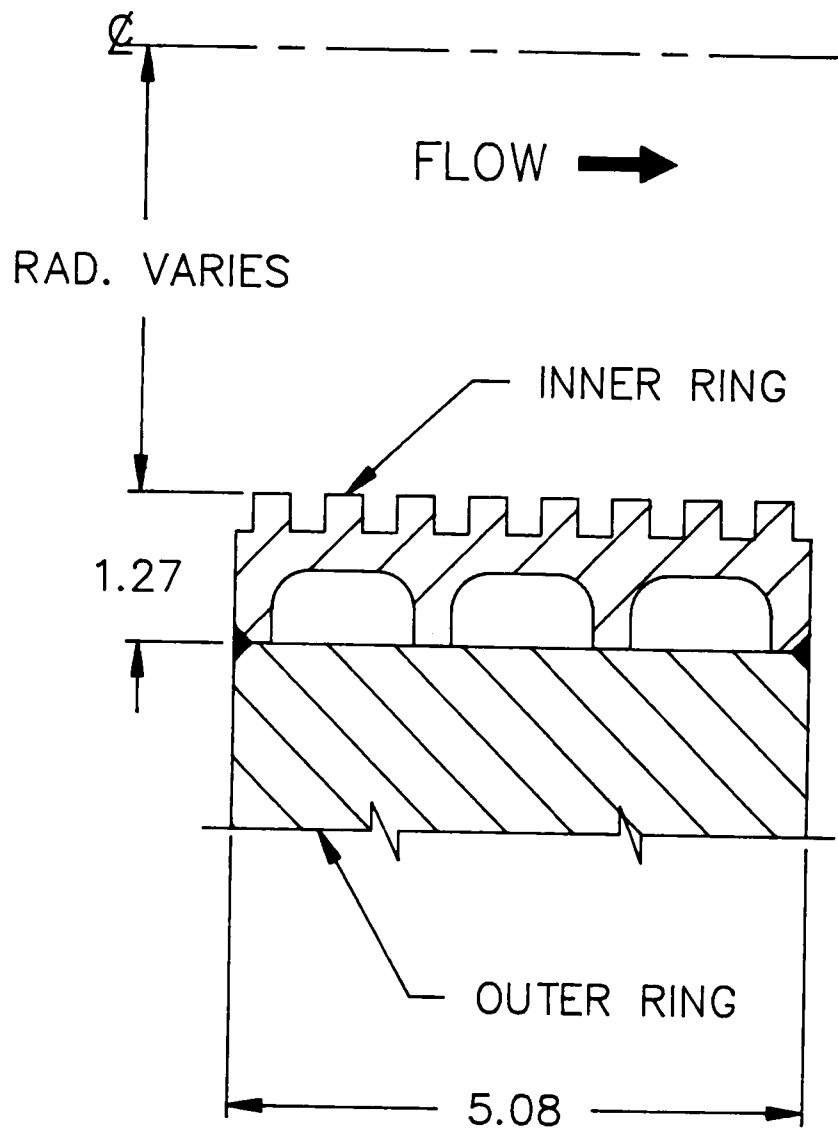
Typical Weldment of Inner and Outer Rings
